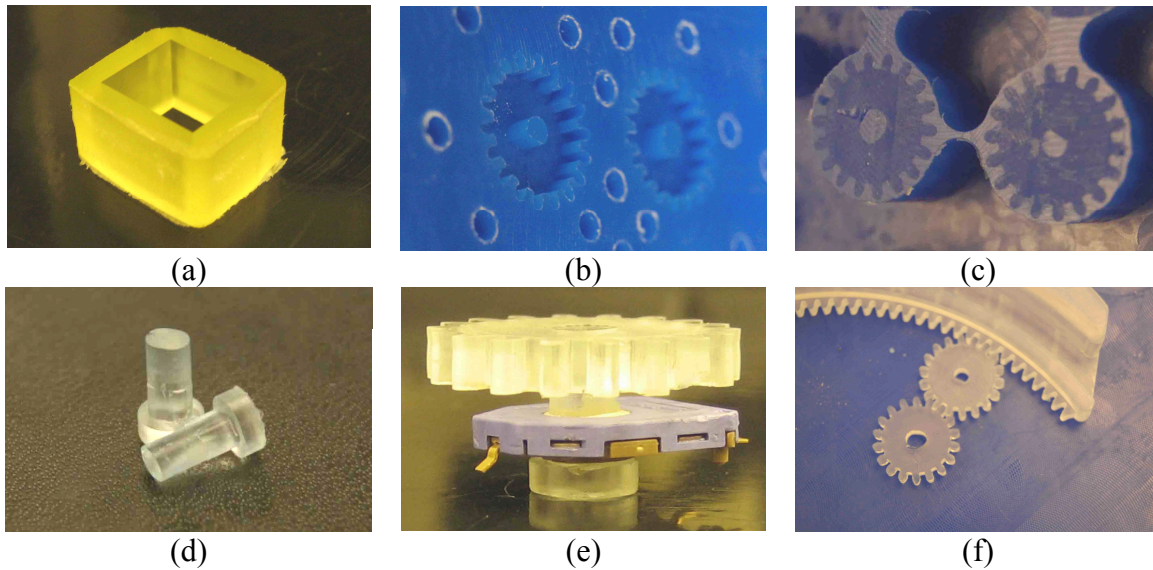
Motor Insert (a), Gear Pockets (b), Planed Gears (c), Pot Shaft (d), Pot/Shaft/Gear Assembly (e), Motor Pot and Slider Gears (f).
